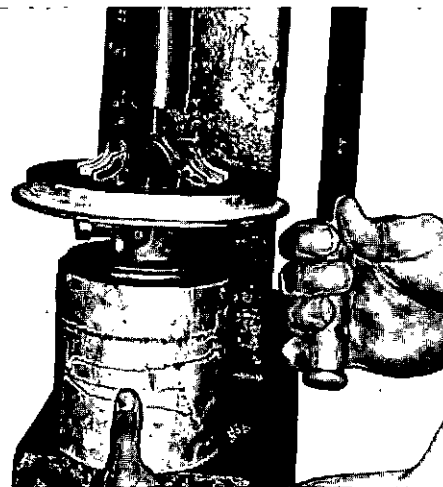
, (TA49). Pressing out the turbine wheel and shaft
